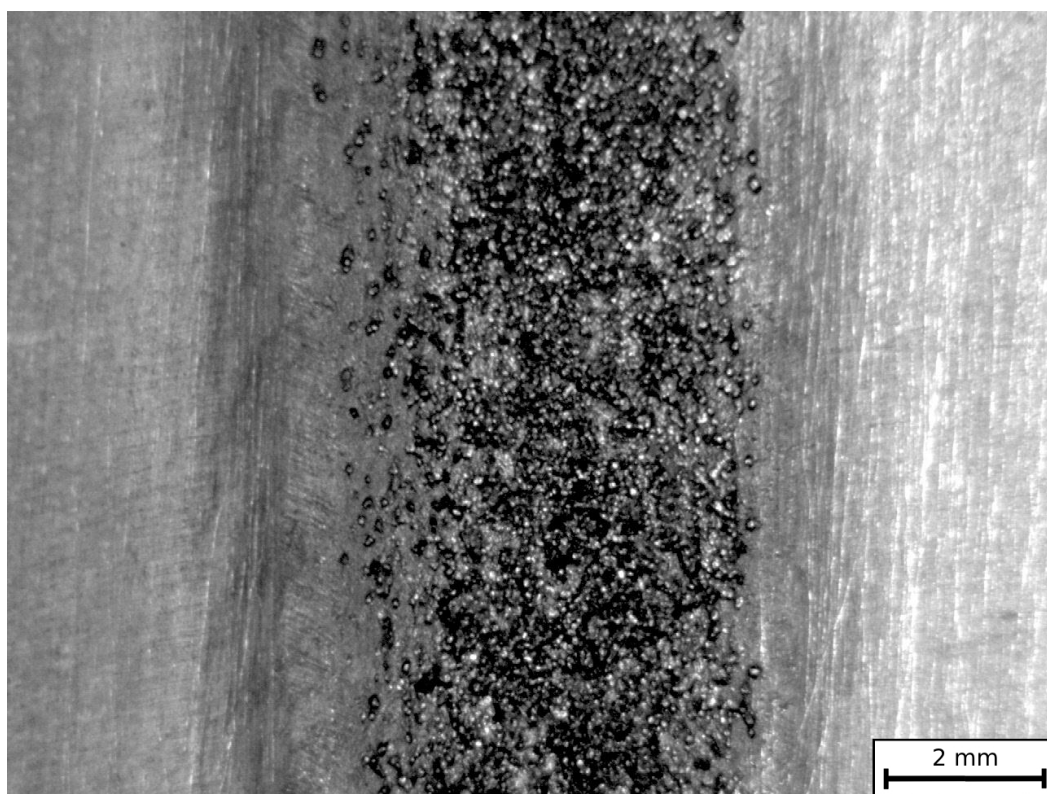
View of the MCMgAl9Zn1 casting magnesium alloy face of weld after laser treatment with Al_2O_3 , scan rate: 0.5 m/min, laser power: 2.0 kW
